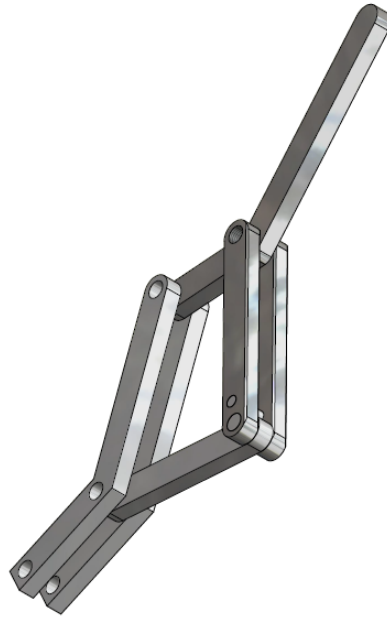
Single finger grasping tool main design CAD using Autodesk Inventor [41].
